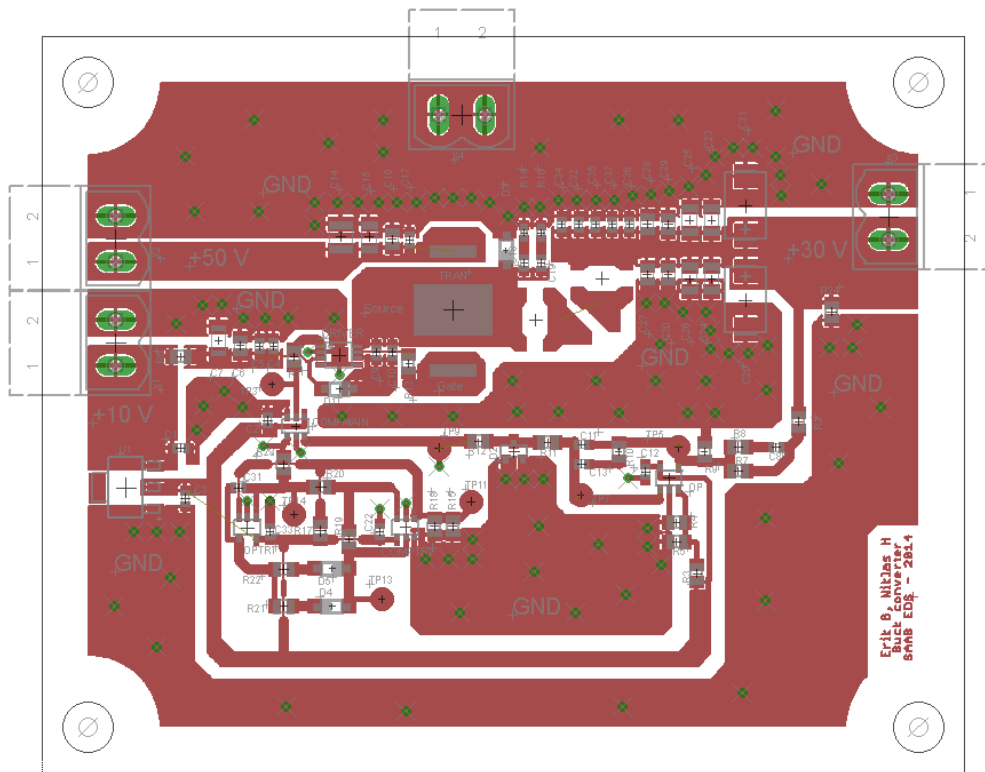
Layout of the top layer, Buck converter. The board is 100x80 mm.
